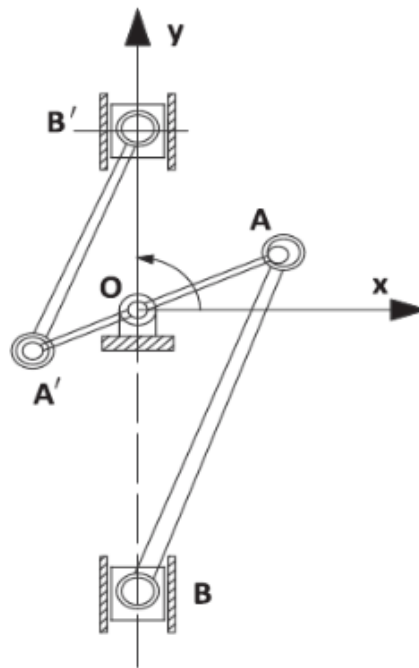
A double slider-crank mechanism. Reprinted from [30].
